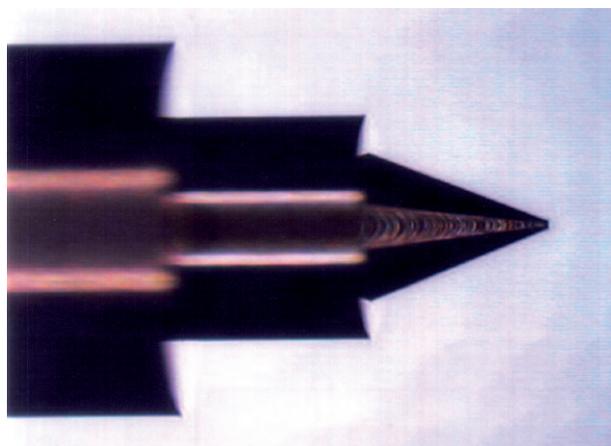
Copper mandrel with datum surfaces machined.
